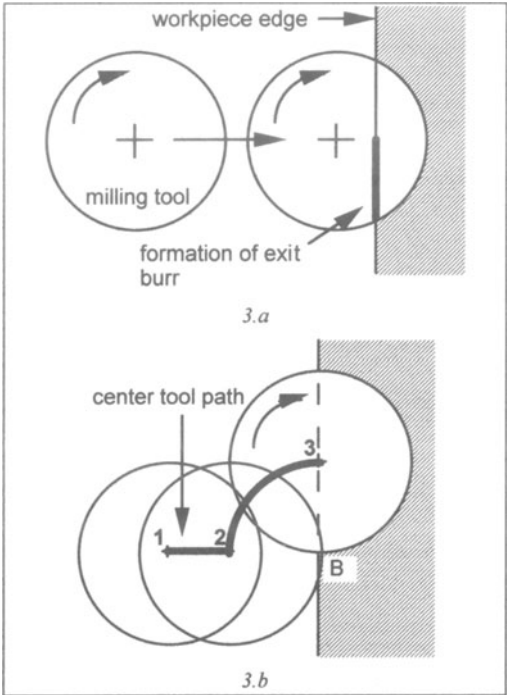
(From [6]) tool entry with orthogonal path (3.a): burr formation; tool entry with a circular path (3.b): no burr formation.
